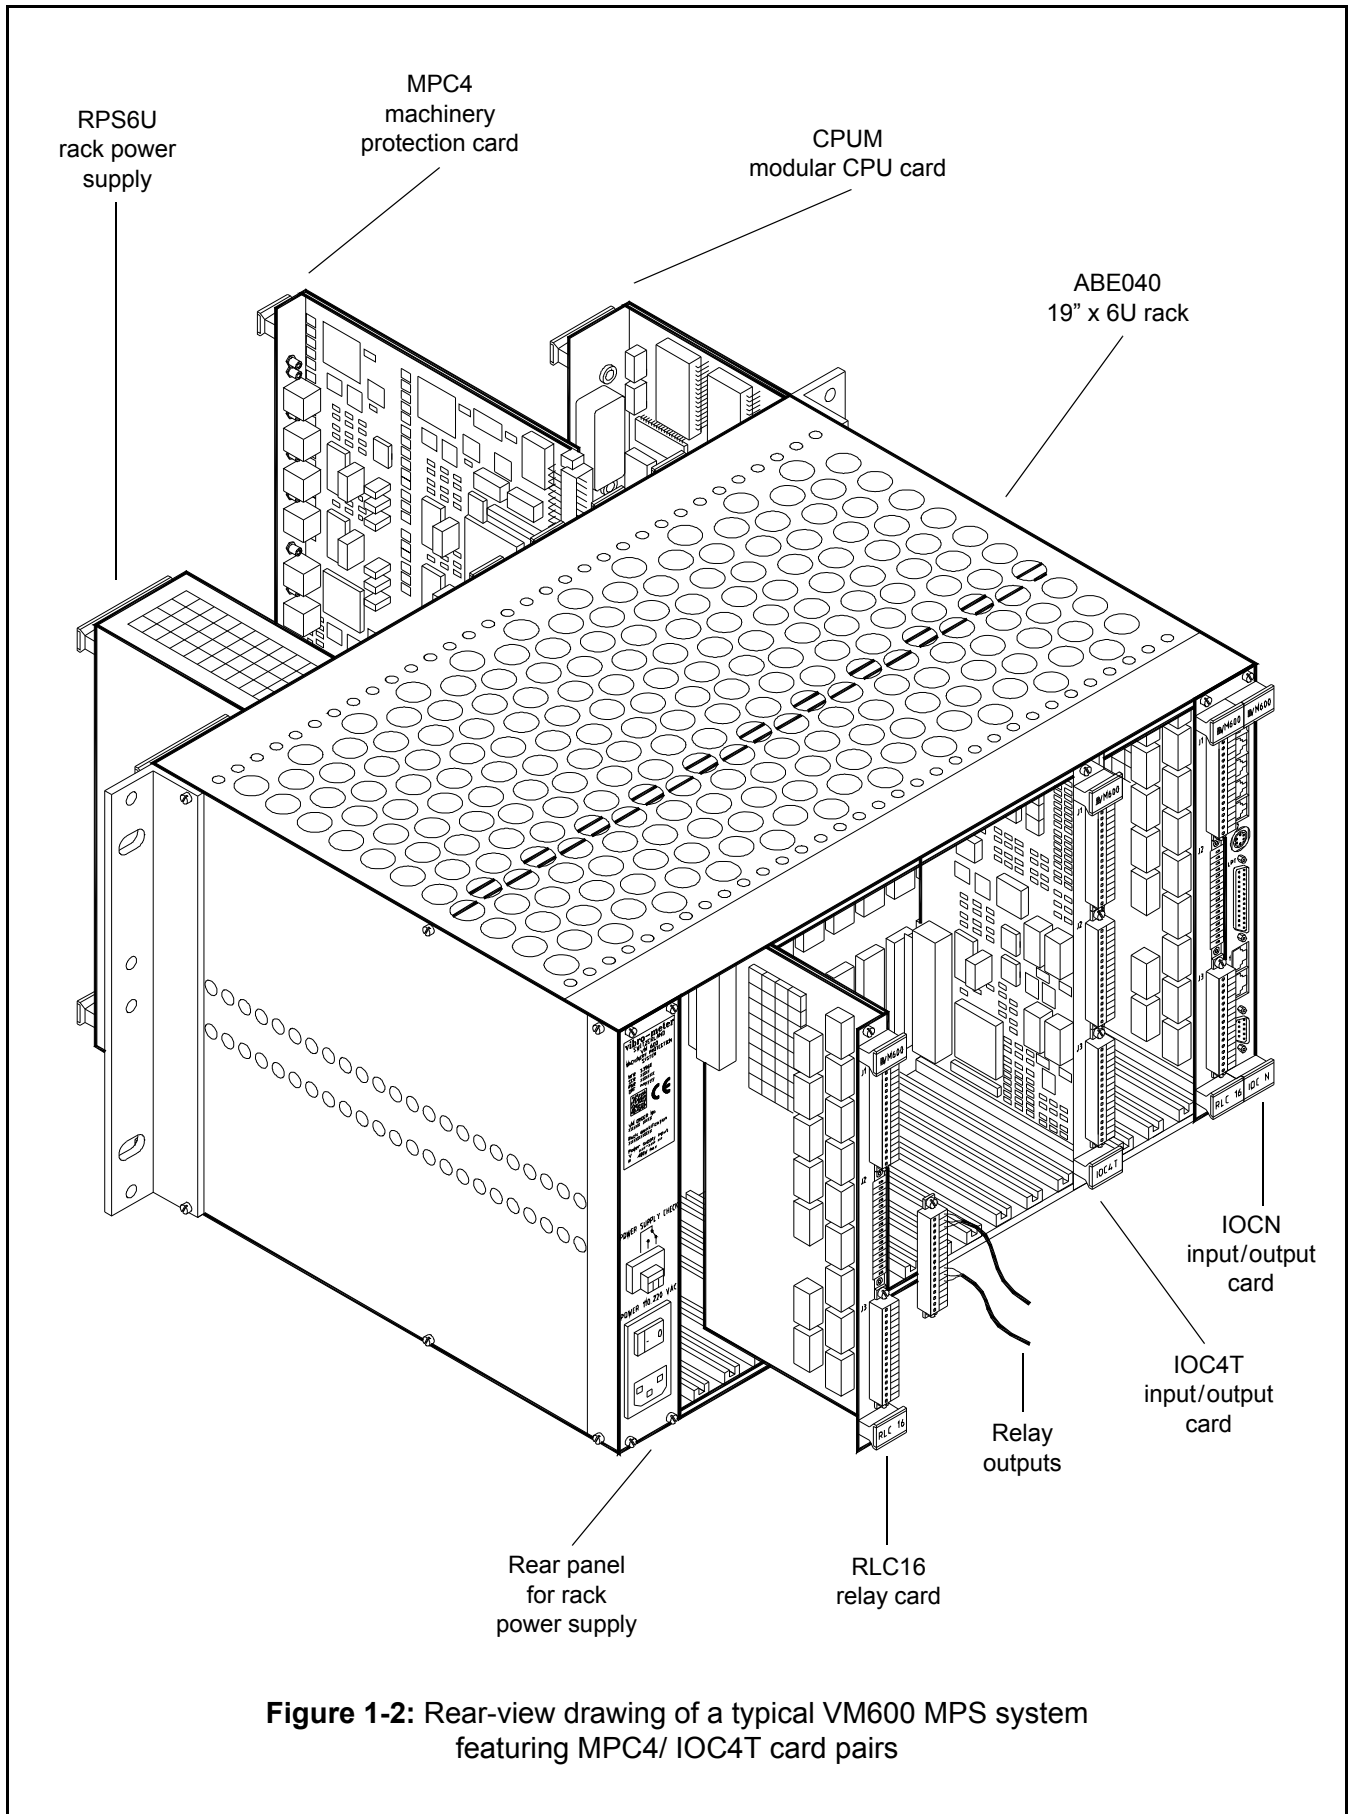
Rear-view drawing of a typical VM600 MPS system featuring MPC4/ IOC4T card pairs
